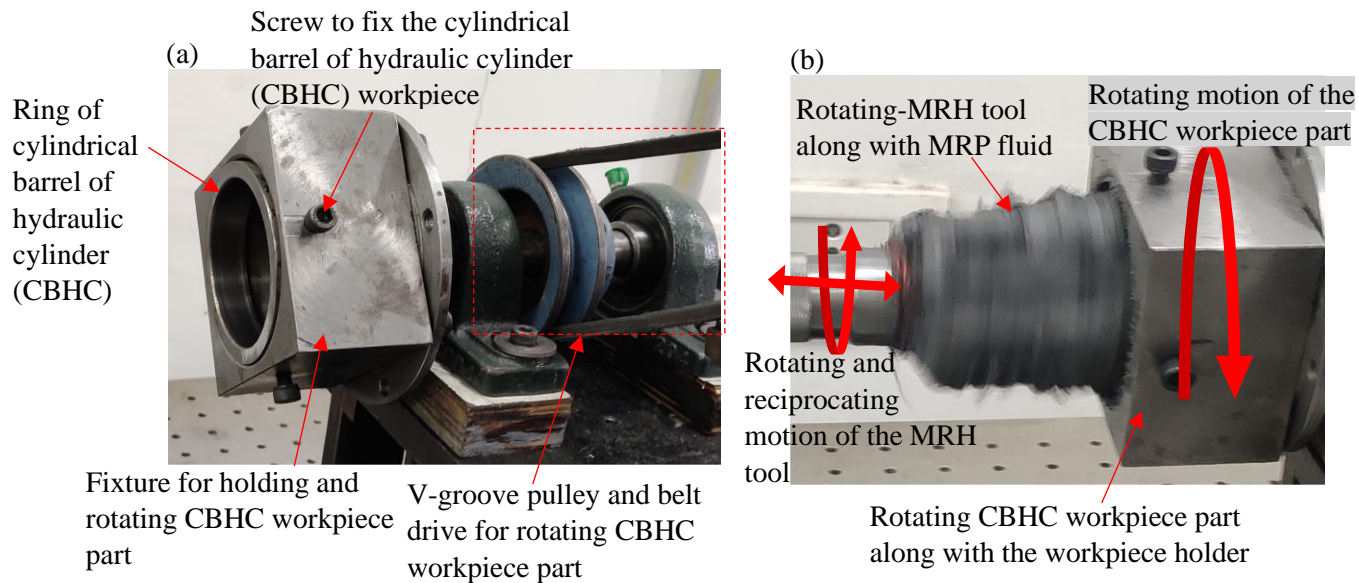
(a) Fixture holding and rotating the cylindrical barrel of hydraulic cylinder (CBHC) and (b) finishing operation of the ring of real-time CBHC for preliminary and planned experimentations.
